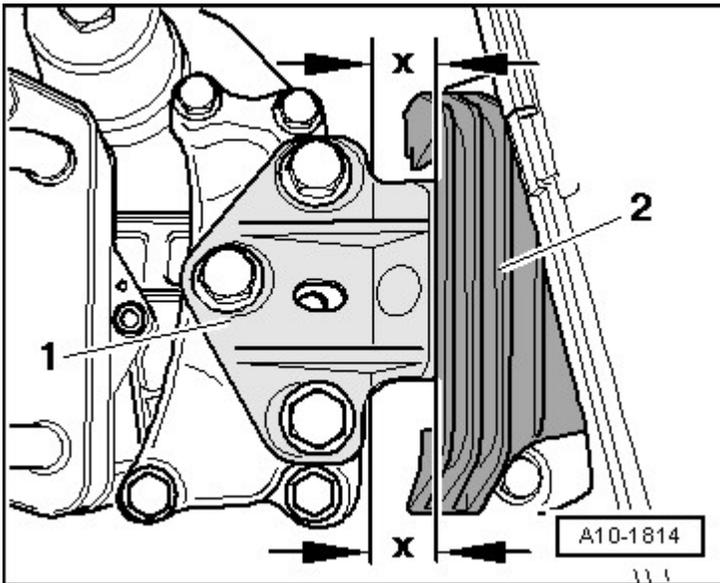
Ensuring Edges On Support Arm And Transmission Mount Are Parallel
